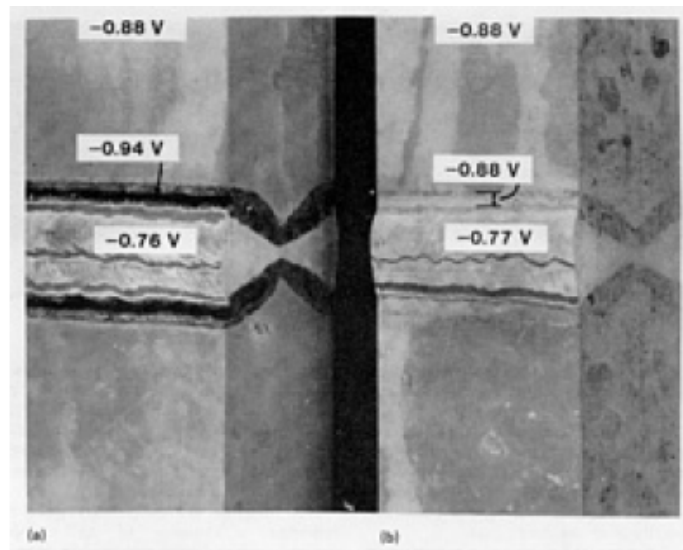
WELDED ASSEMBLIES OF ALUMINUM ALLOY 7005 WITH ALLOY 5356 FILLER METAL AFTER A 1-YEAR EXPOSURE TO SEAWATER
